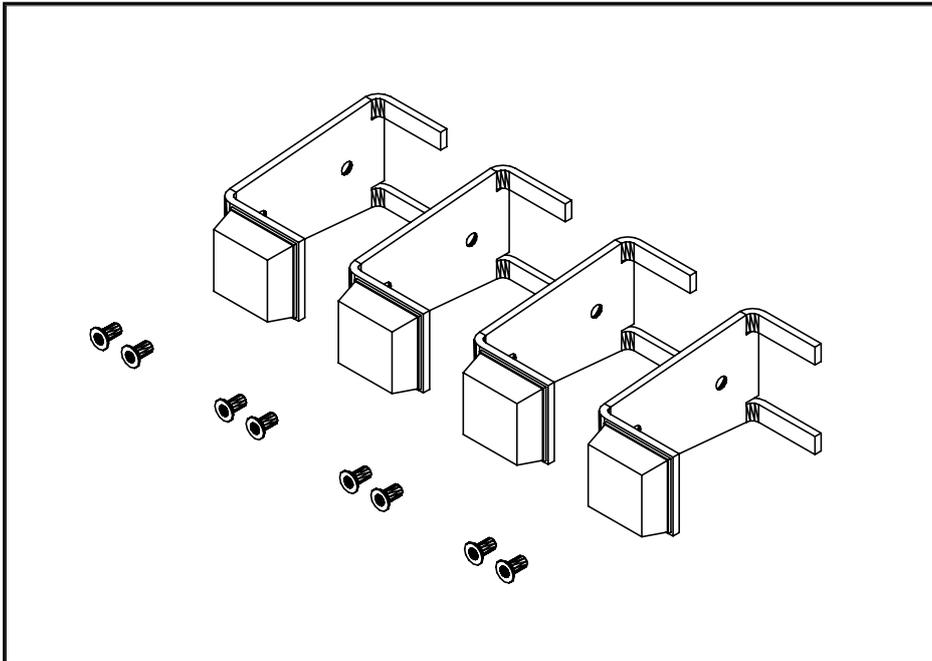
ProDAQ 5726 Stackable Desktop Feet Set Parts
